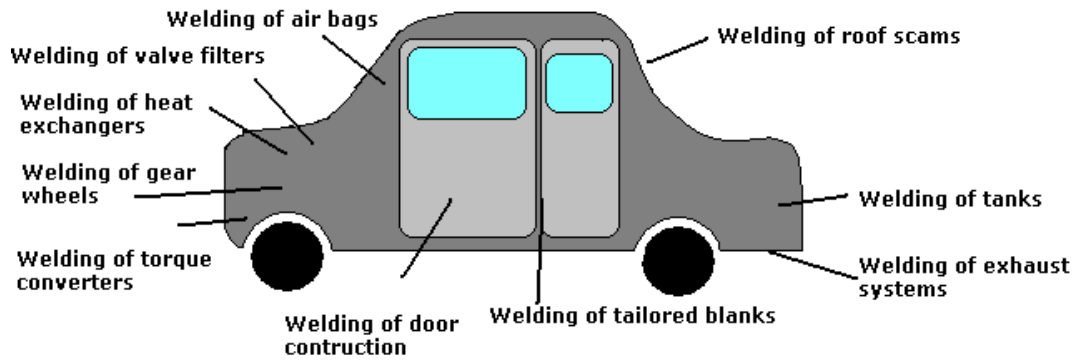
A schematic diagram showing the application of laser welding within a motor vehicle [5].
